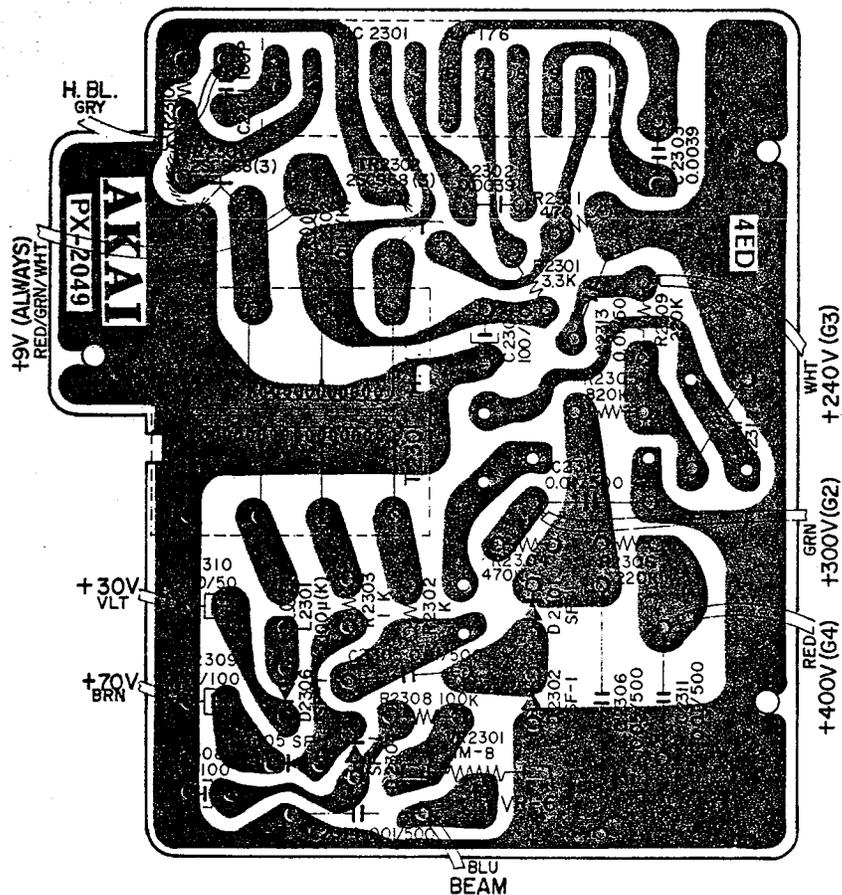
H.V. Generator P.C. Board (PX-2049 4ED)
